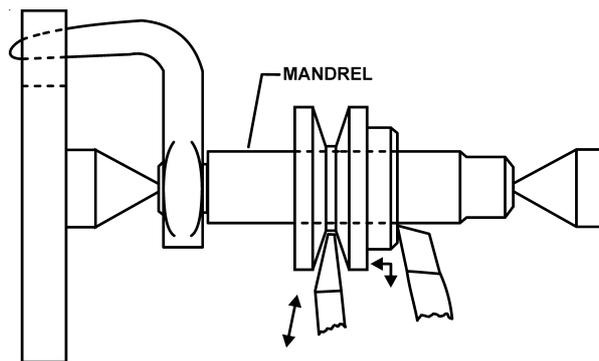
, Facing and turning a pulley held on a mandrel between centers.
